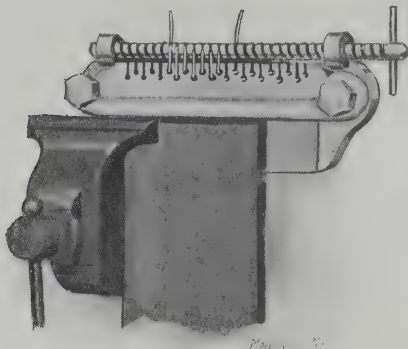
An Inexpensive and Efficient Wire Belt Lacing Tool
